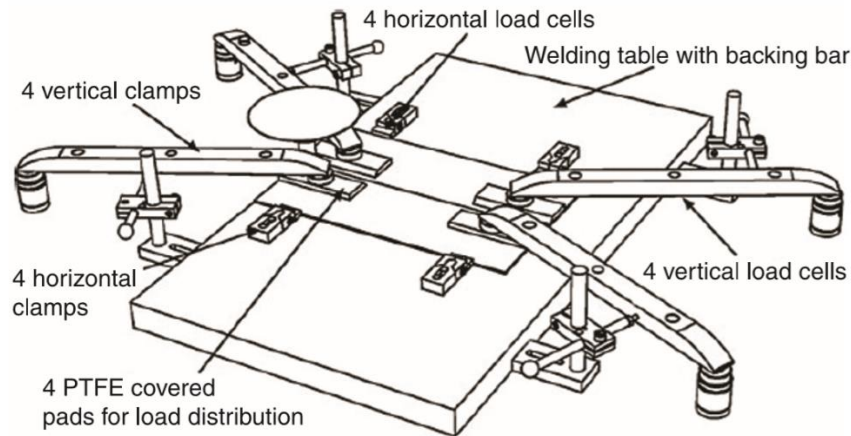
Example of clamping system – Courtesy of [1-5]
